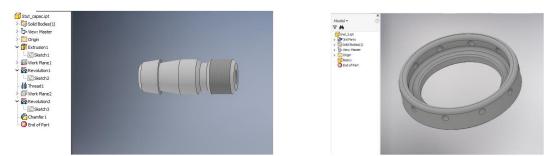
Coupling pneumatic/hydraulic part 4 mm inner diameter at left and ring for pneumatic/hydraulic sealing at right
